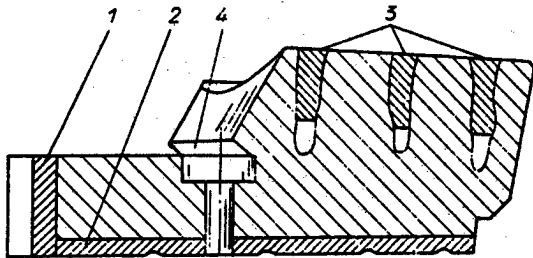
Cross Section of a Gear Rim With Blunt Bolts in the Tooth
